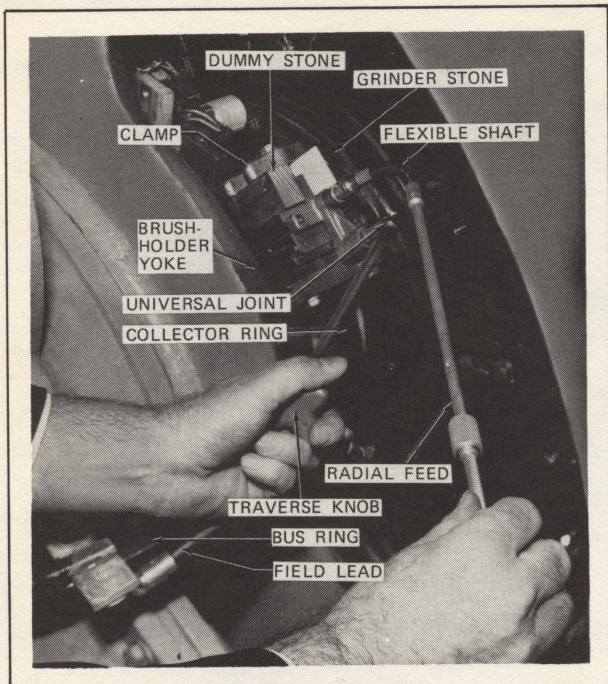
SET-UP FOR GRINDING COLLECTOR RINGS.
